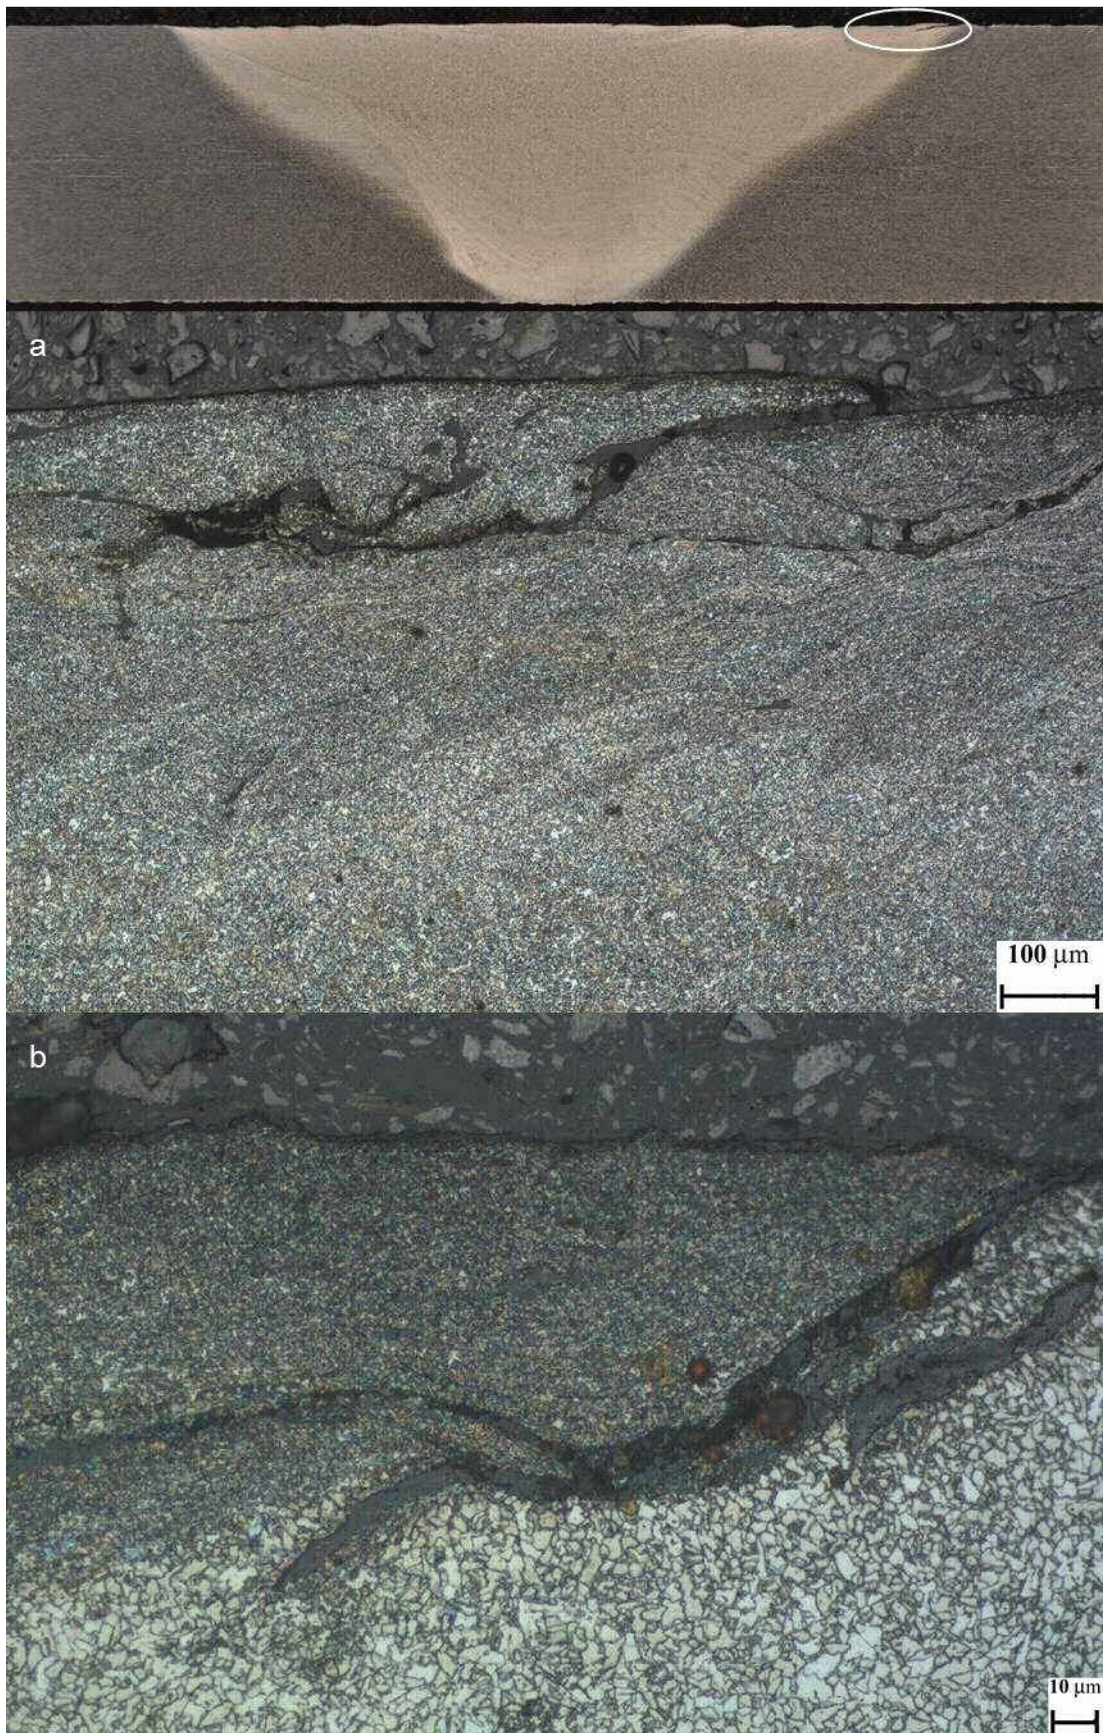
Intermediate weld, RT side top surface (a) [x100, Etched]; (b) [x500, Etched]
